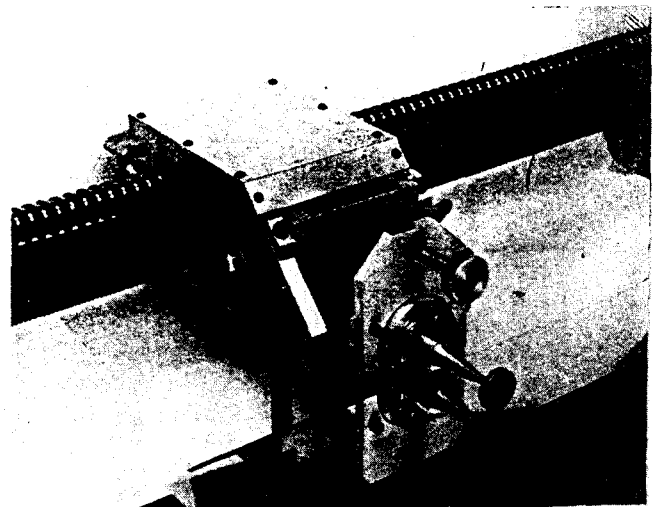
Typical Traversing Head, Continuous Seam Ultrasonic Welding Machine
